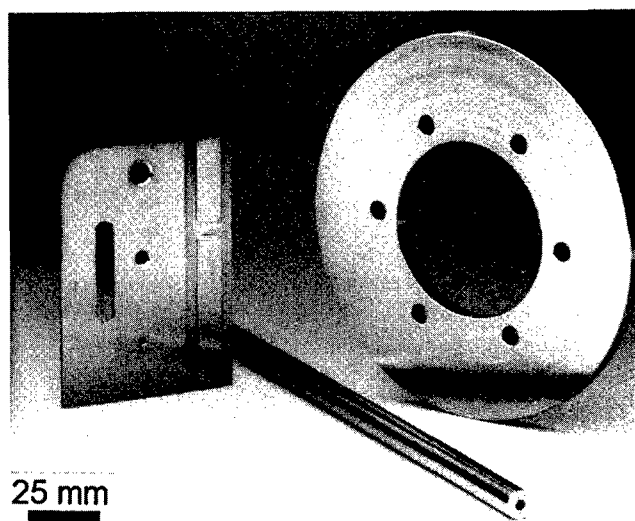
Machined  $\gamma$ -TiAl parts. For machining of these parts the following operations have been included: grinding, milling, drilling, turning, electro-discharge machining.
